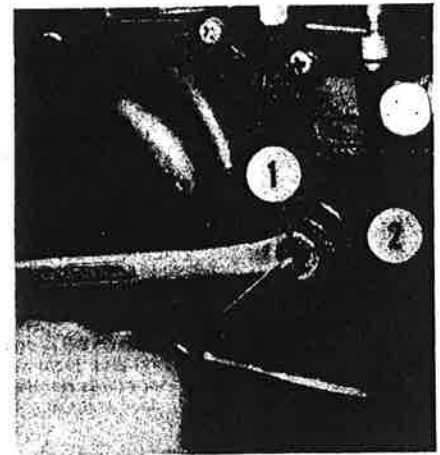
View of clutch adjuster used on some models. Turn screw (2) in until a resistance is felt then back out 1/4 turn and tighten lock nut (1).
